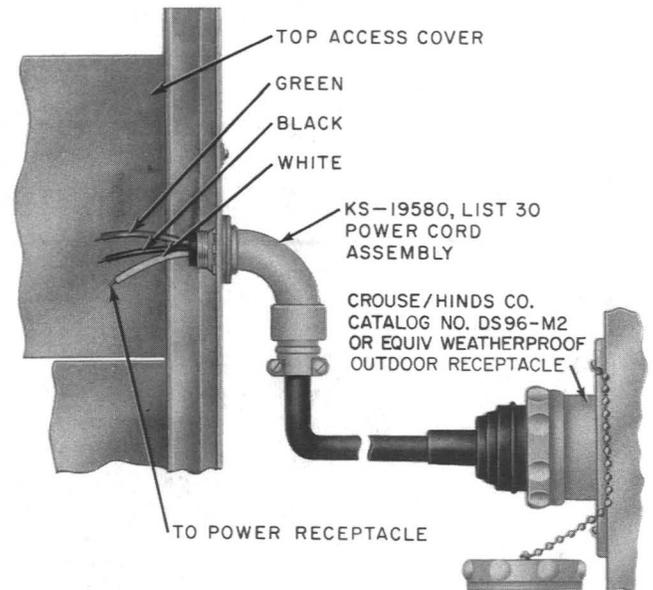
KS-19580, List 30 Power Cord Assembly for Overhead Entrance
